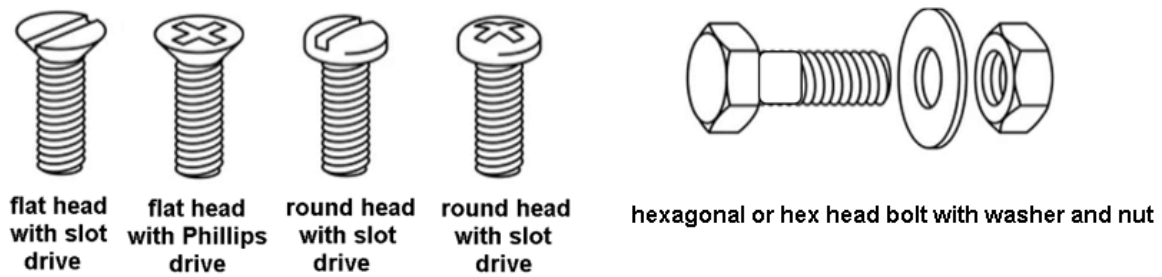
Common types of machine screws (left) and a hexagonal bolt (right)
